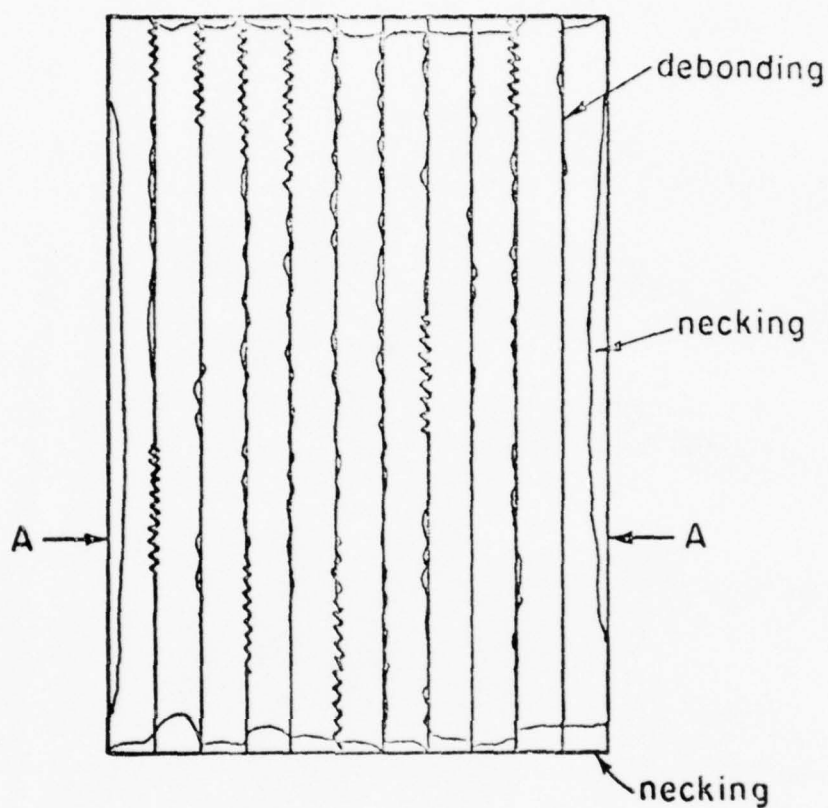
A Schematic Fractograph for Specimen D3P4 ( $f_s = 1.00$ ). Exclusively ductile shear fracture occurred in this specimen. There was about 95% debonding and large amount of necking observed.
